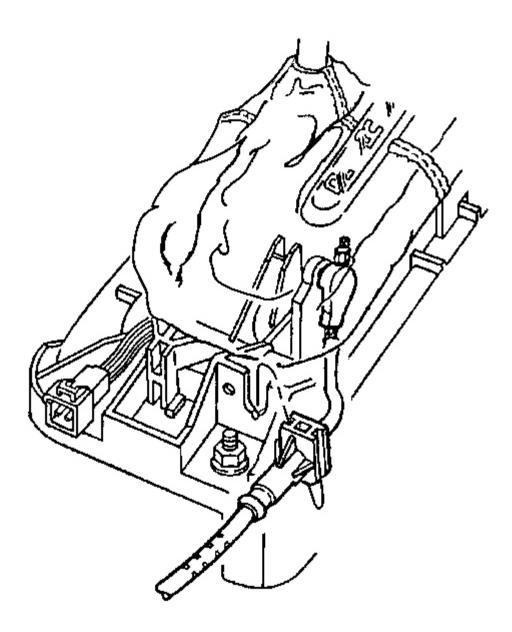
Park/Lock Cable & Shift Control Slot Courtesy of GENERAL MOTORS CORP.
